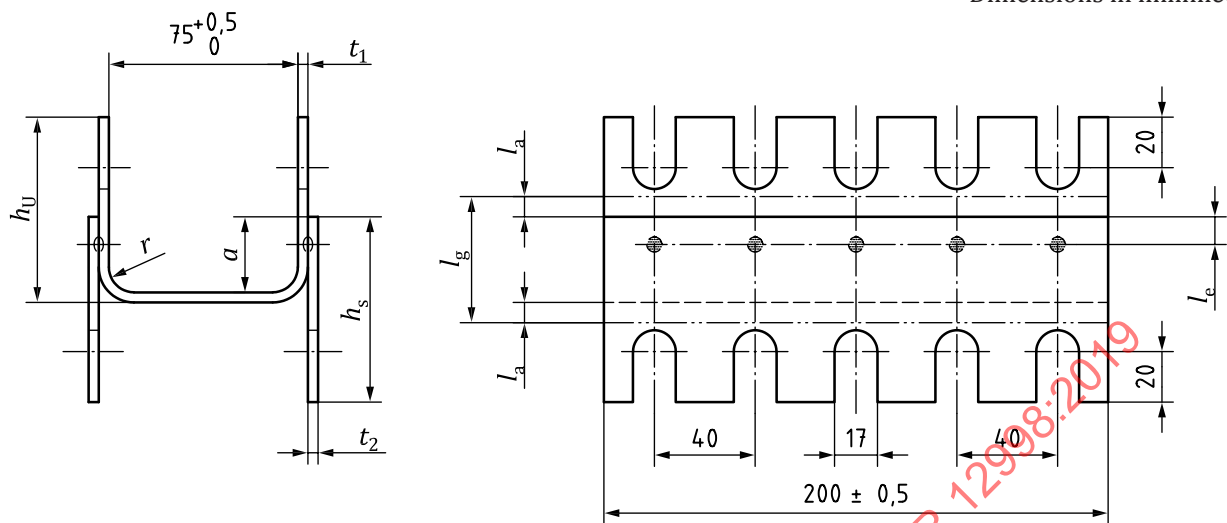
"Flat" multi-joint peel specimenTable 5 — Dimensions of "Flat" multi-joint peel specimens and H-peel specimens
